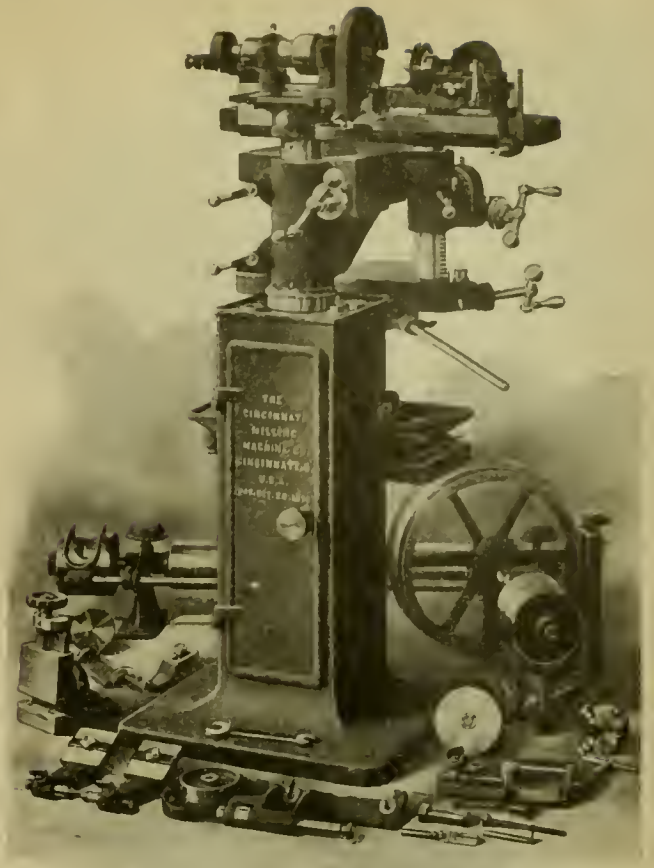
UNIVERSAL TOOL AND CUTTER GRINDER—CINCINNATI MILLING MACHINE COMPANY.
